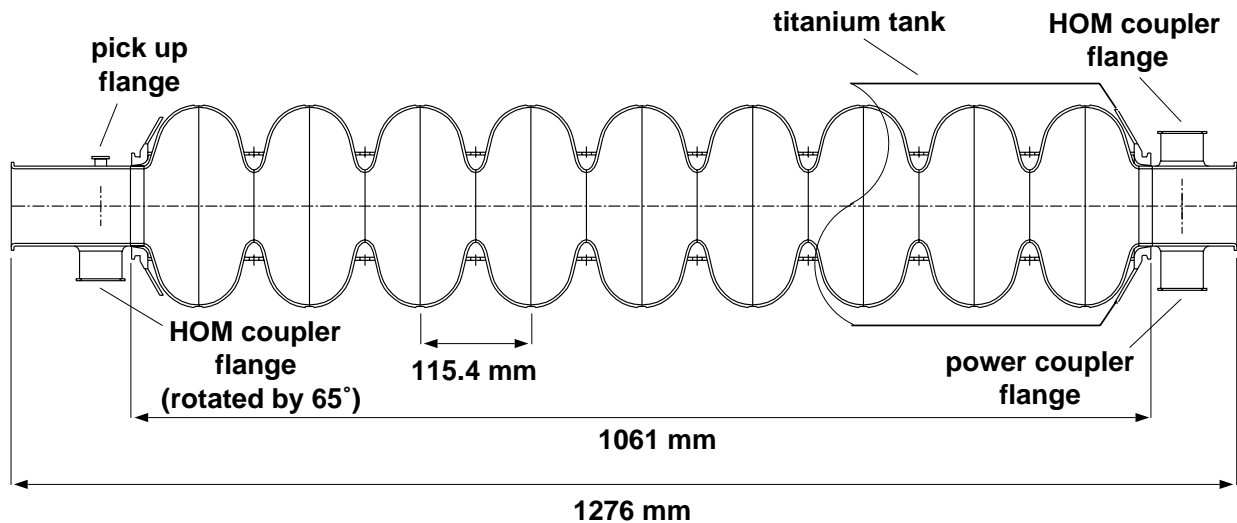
Schematic drawing of the TESLA/TTF cavities.
